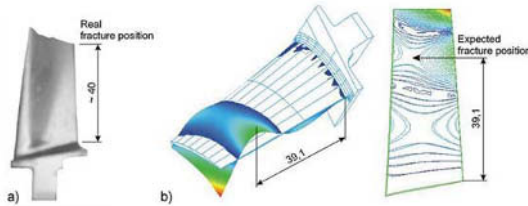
Real (a) and expected fracture position (b) of blade B3
